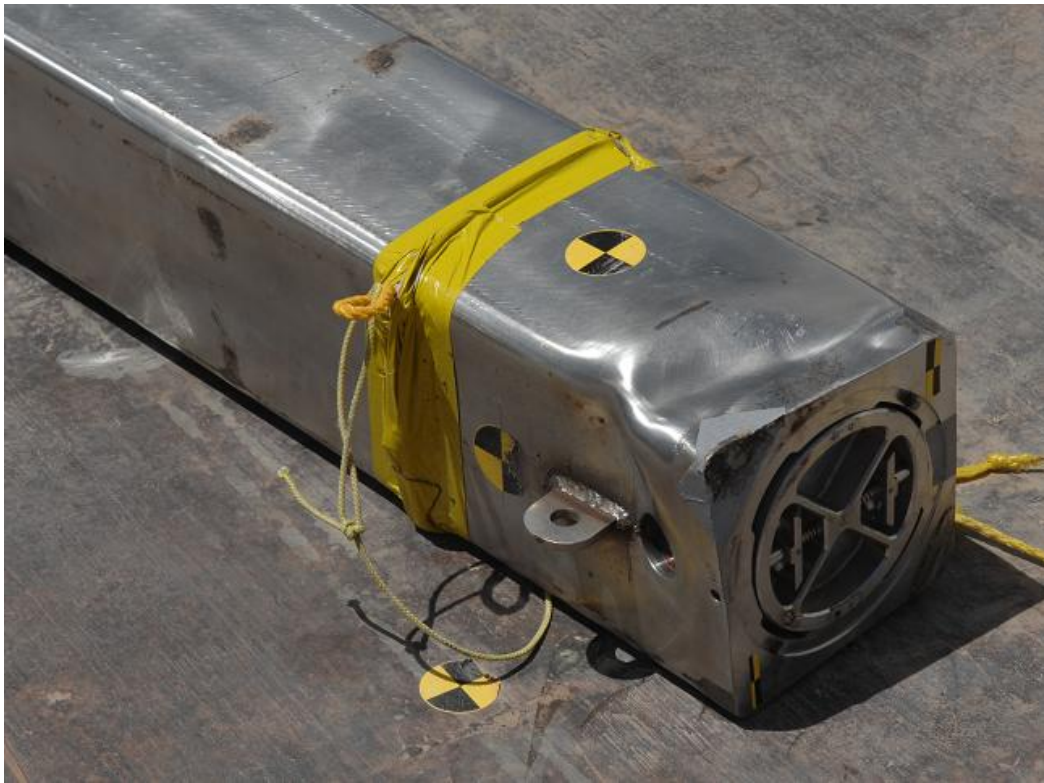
Damage Following the 30-foot C.G.-Over-Corner Free Drop
